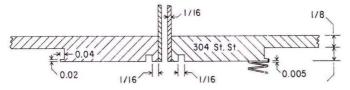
Cross-section of top plate and gas inlet showing design necessary for arc welding. Dimensions are in inches.
